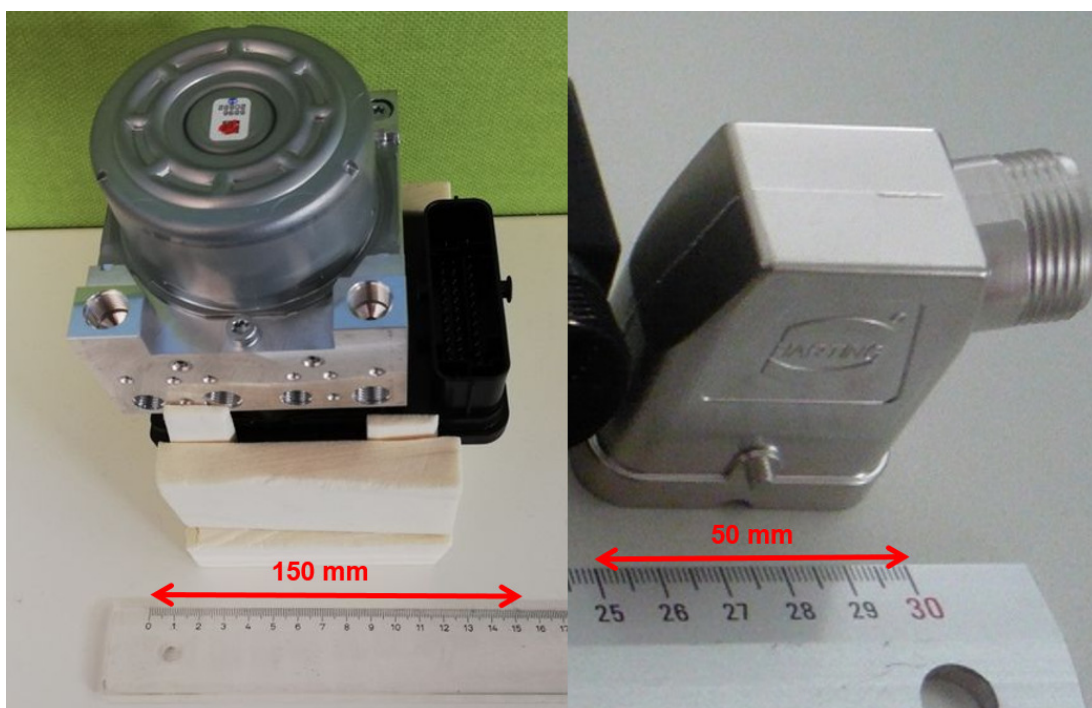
Photographs of the industrial workpieces whose tomographies were used to test ESC. Left: controller from the automotive sector. Right: zinc die-cast plug housing.
